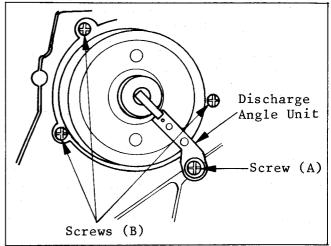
Replacement of D.D. Cylinder Unit-(1)
